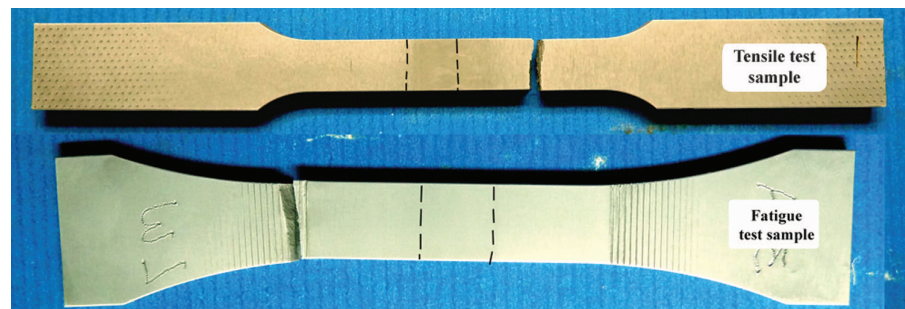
Macrograph of fractured samples in tensile and fatigue tests.
